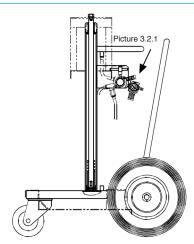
Single-Post Lift for Dum Cover Capacity: 98 kg / Elevating height: 600 mm
